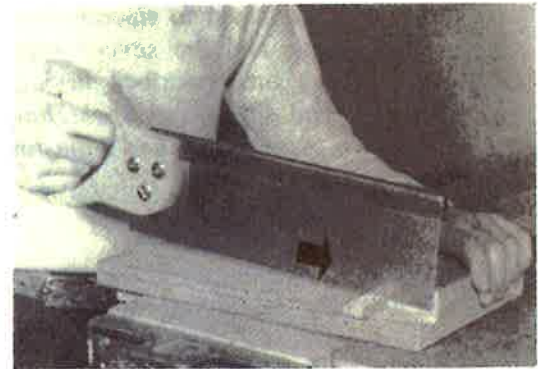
Cutting a board with the backsaw on a bench hook.
